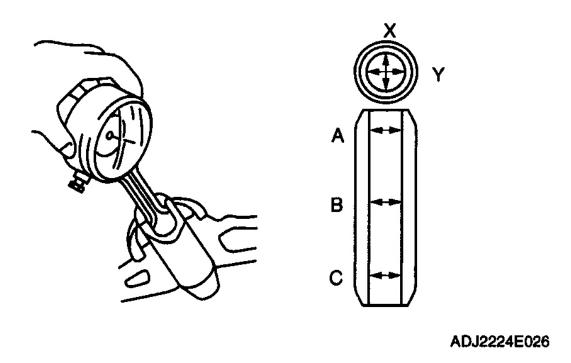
Measuring Valve Guise Inner Diameter Courtesy of MAZDA MOTORS CORP.
